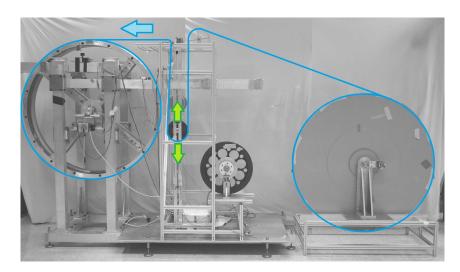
Fibre winding machine prototype used to wind the mats for the demonstrator.
